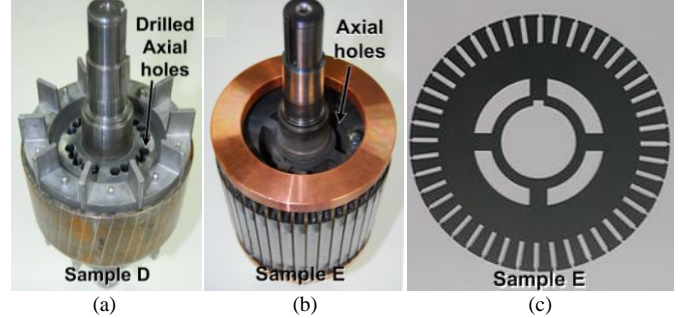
(a) Al die-cast rotor with 4 drilled axial holes (sample D); (b) fabricated Cu rotor with 4 laser cut axial holes (sample E); (c) rotor lamination for sample E
